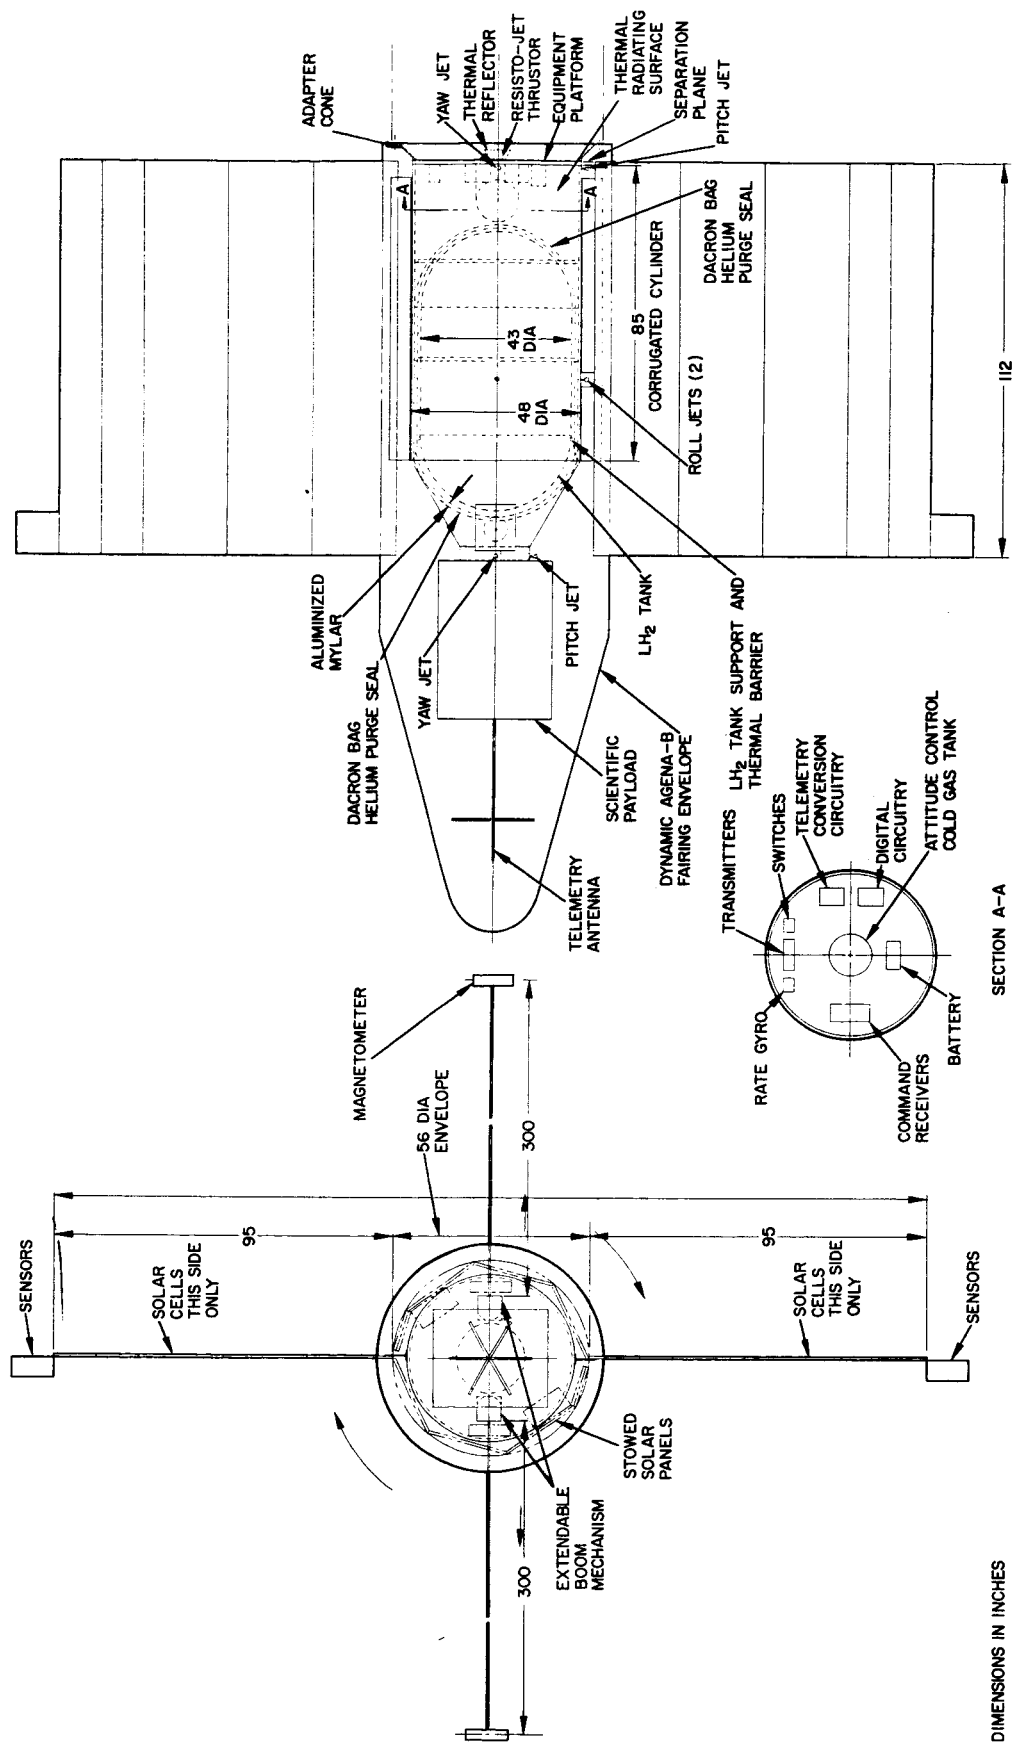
Single-Tank Resisto-Jet Engine Spacecraft Perspective View
